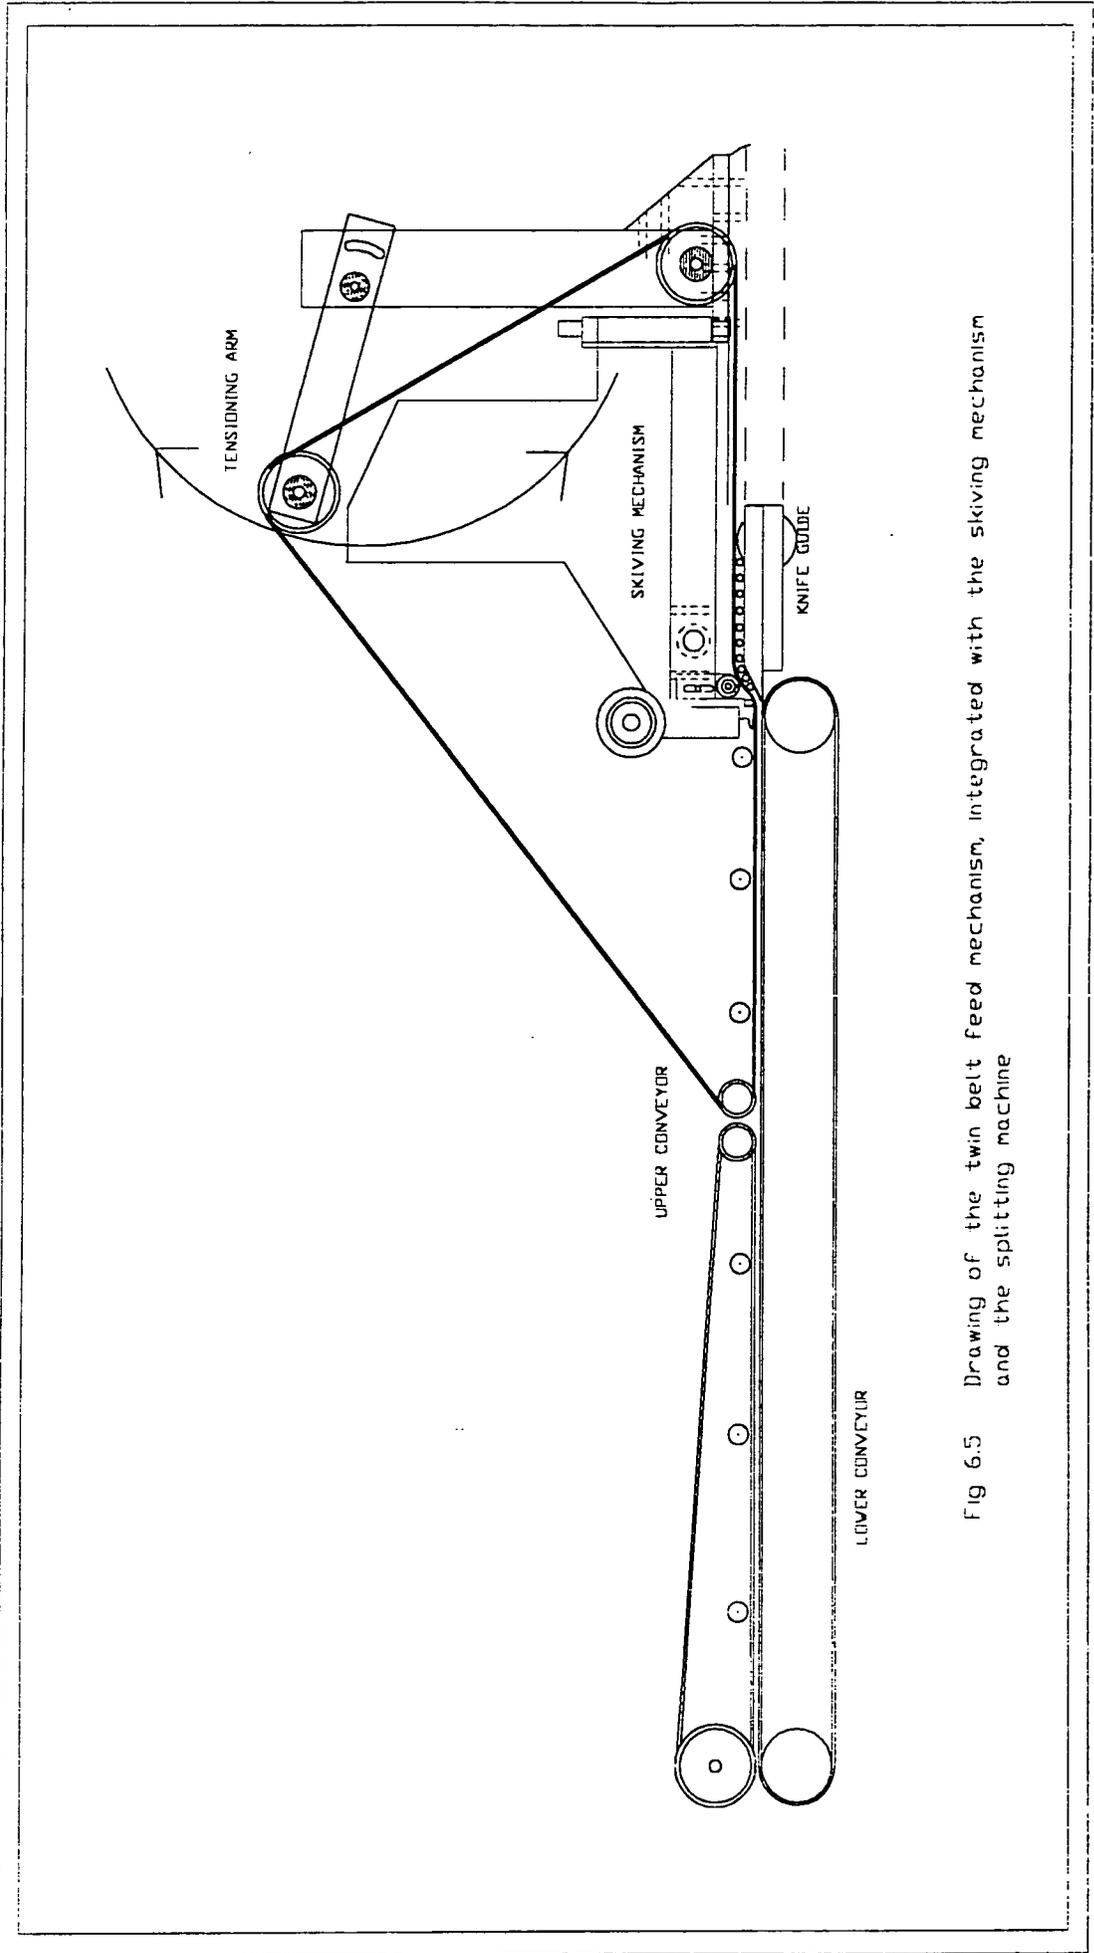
Drawing of the twin belt feed mechanism, integrated with the skiving mechanism and the splitting machine
